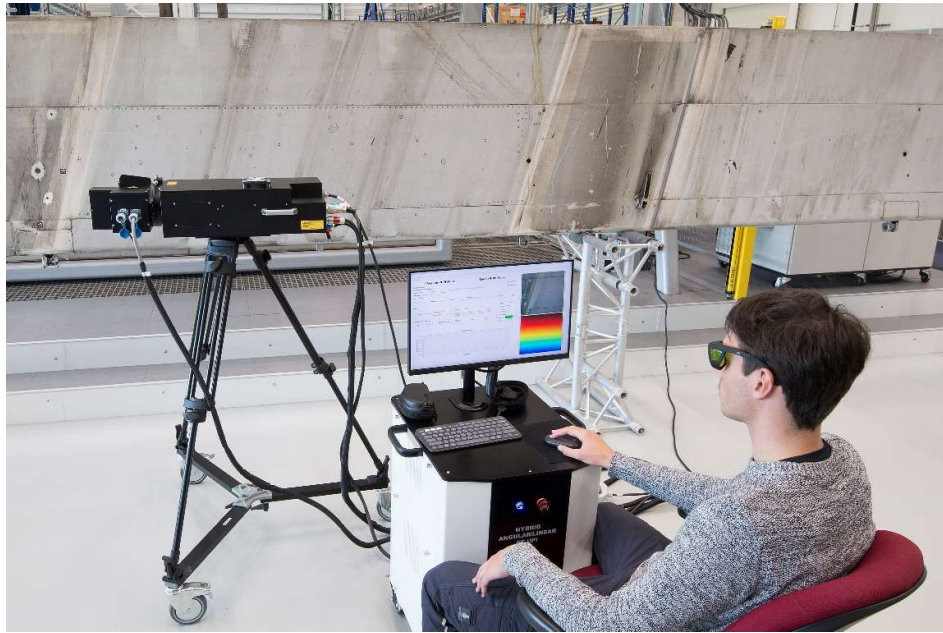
The laser ultrasonic inspection system scanning an aircraft component.
